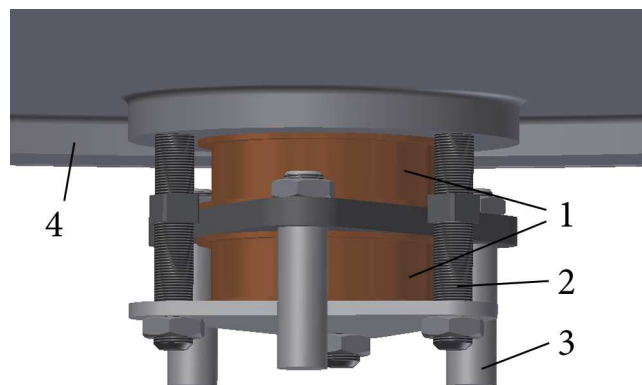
Two compensating bellows 1 – welded bellow, 2 – prop for correcting the position and extension of the bellows, 3 – anchor to the floor, 4 – flange of the vacuum chamber
